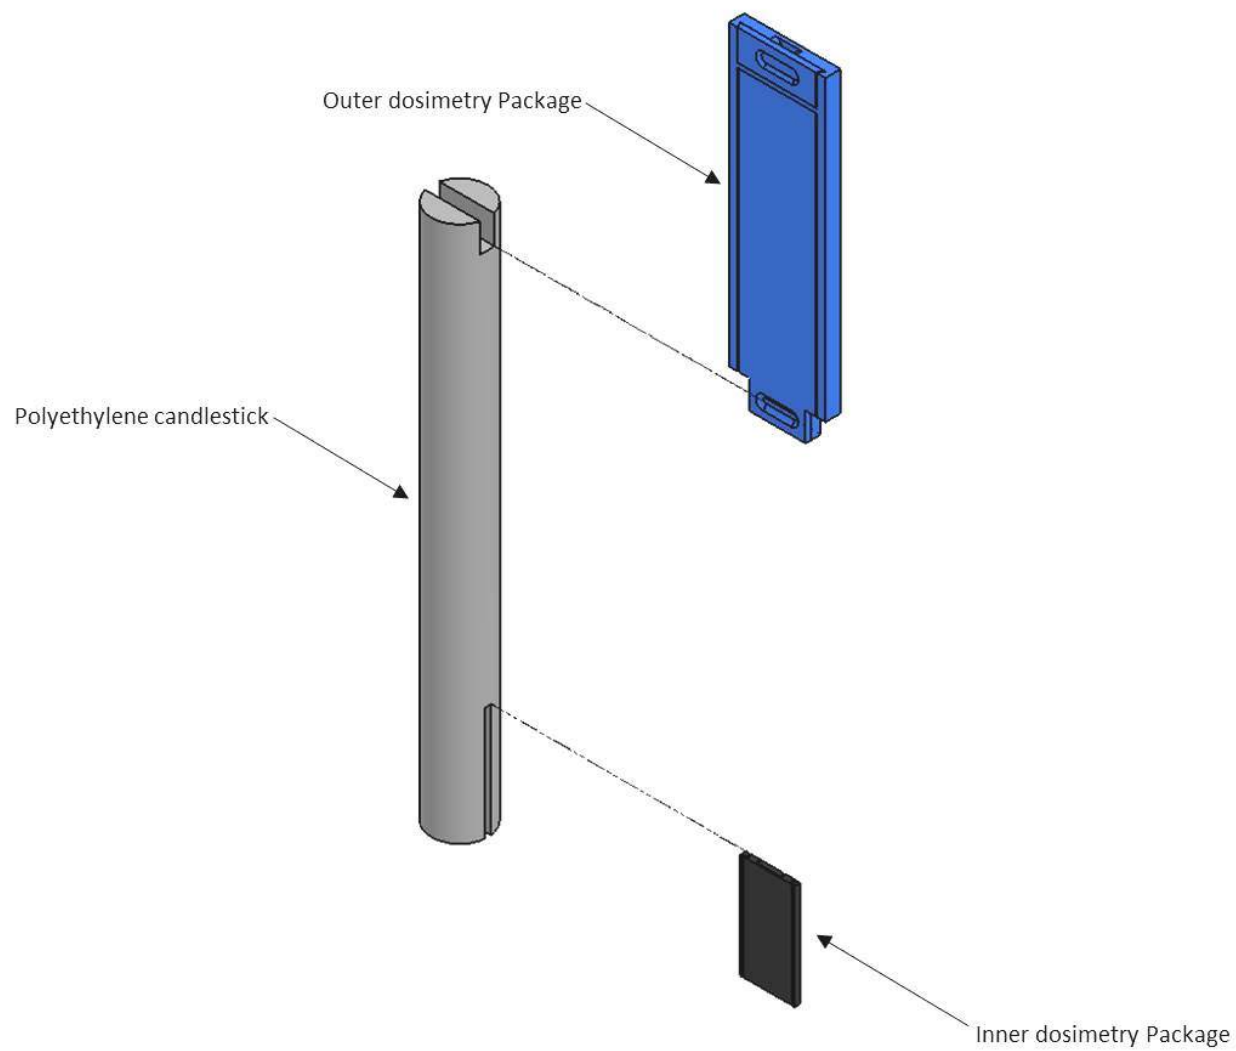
PNNL FNAD "Candle" Assembly with Inner and Outer Dosimetry Packages
